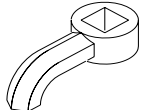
Sheet 1 : Torque Wrench and Adapter Formulas
